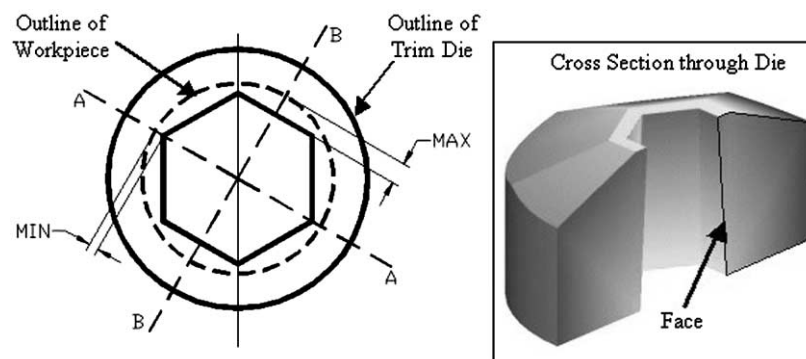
Plan view of trim die and workpiece: inset: cross-section taken through a 3D model of the die.
